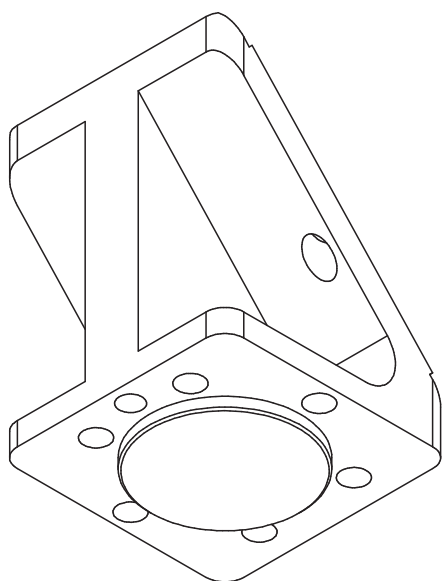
View of 47° mounting adapter for SC25x0 from below (sensor side)
